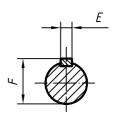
Basic layout of cylindrical keyed shaft ends without internal thread
